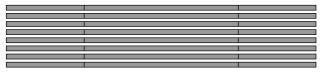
Each stripped plate will be an individual flange that is welded to a web plate.
